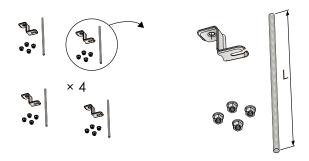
Assembly fitting SYST MS M8-1, ceiling mount and threaded rod
